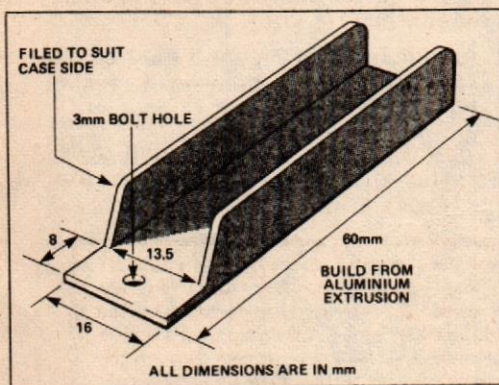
Details for the aluminium extrusion that houses the photoprobe.
